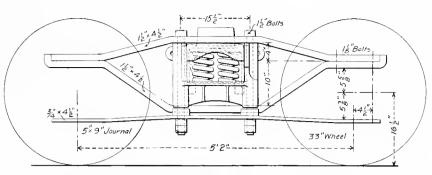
Standard Arch Bar Truck Side Frames. American Steel Foundries.
